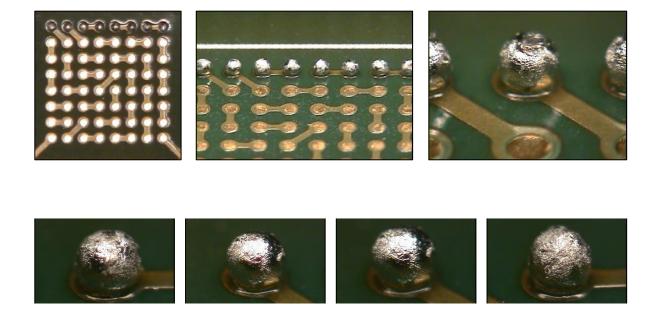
Optical micrographs of the SAC305 solder balls on the surface-finished test PCB.
